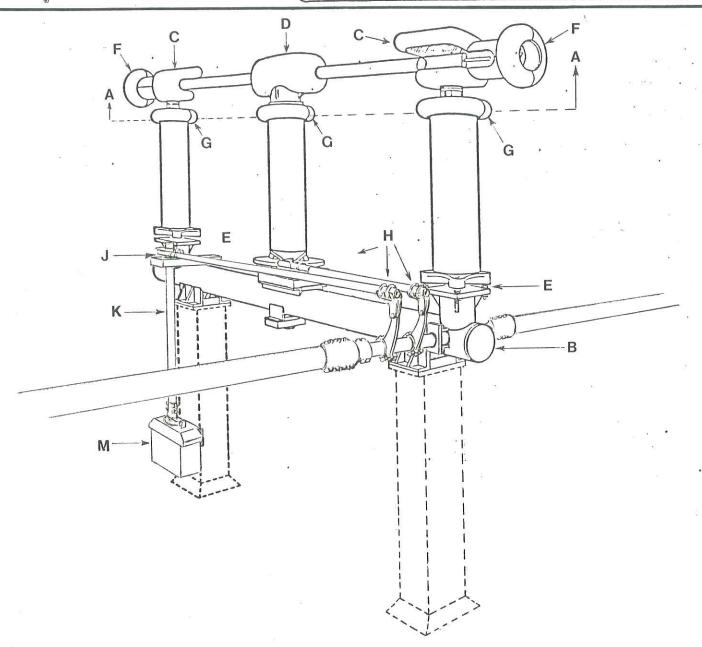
This illustration shows an RDA with motor operation. The purpose of this drawing is to show relationships of the parts, and not specific components. For mounting dimensions, refer to the Operating Mechanism drawing that comes with each switch.
